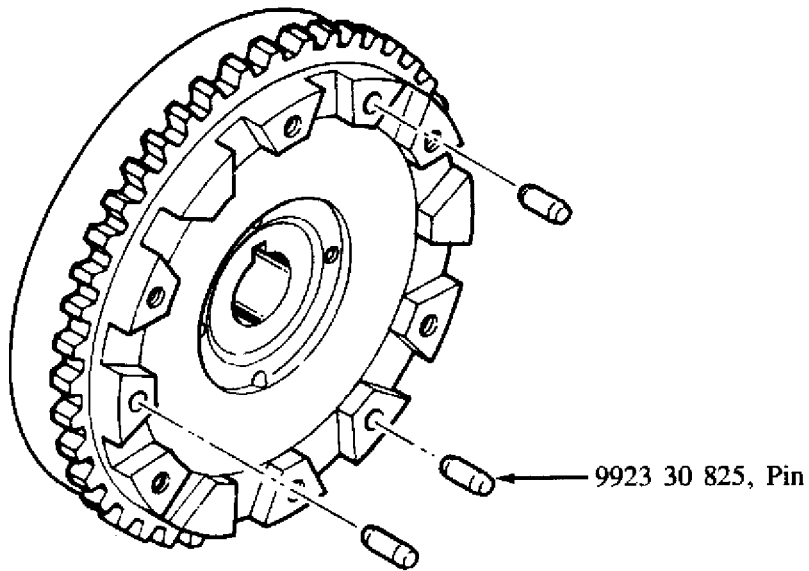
83-86 RX7 Flywheel and Alignment Pins
